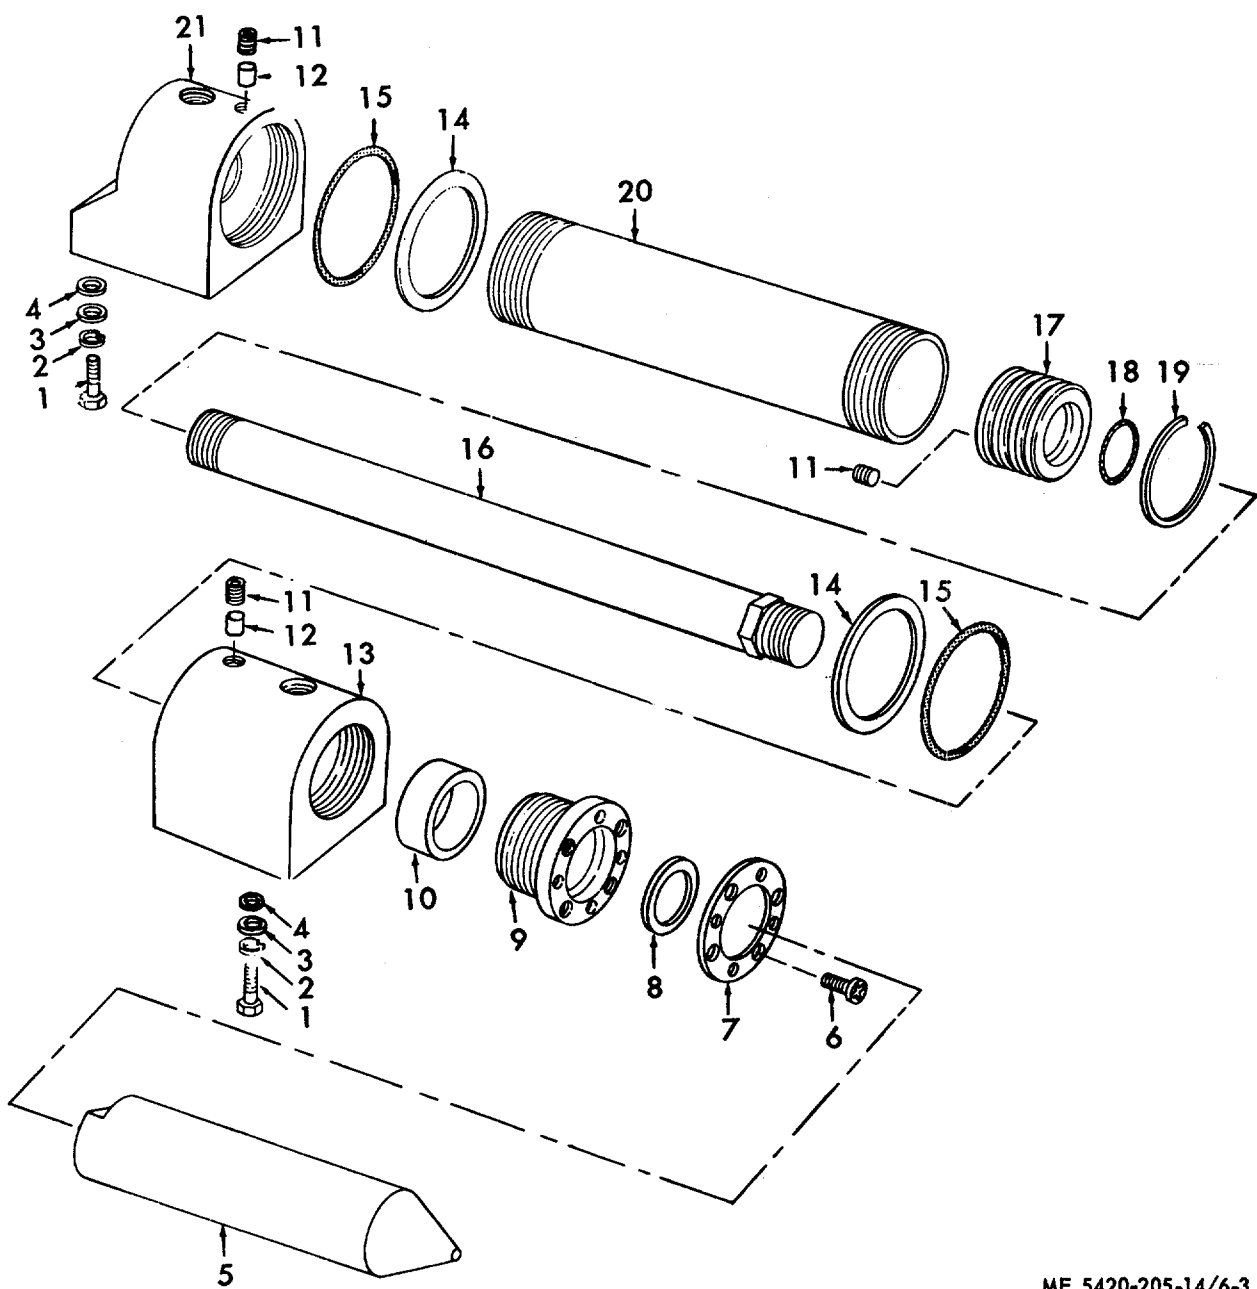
Curbing cylinder, disassembly and reassembly.
